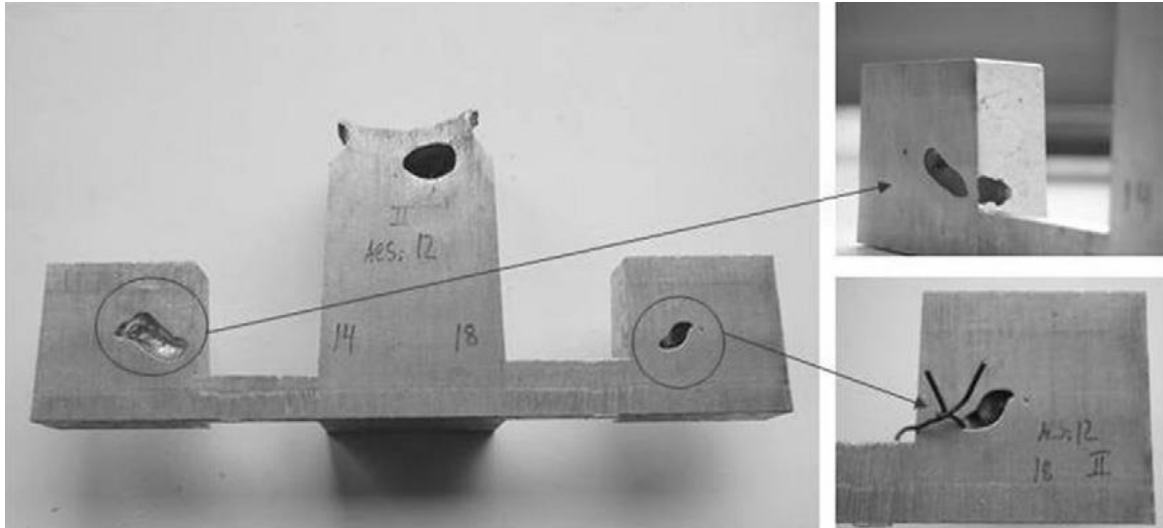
Detail views from AlSi12, short freezing, section 14 mm and 18 mm, showing the surface connected porosity.
